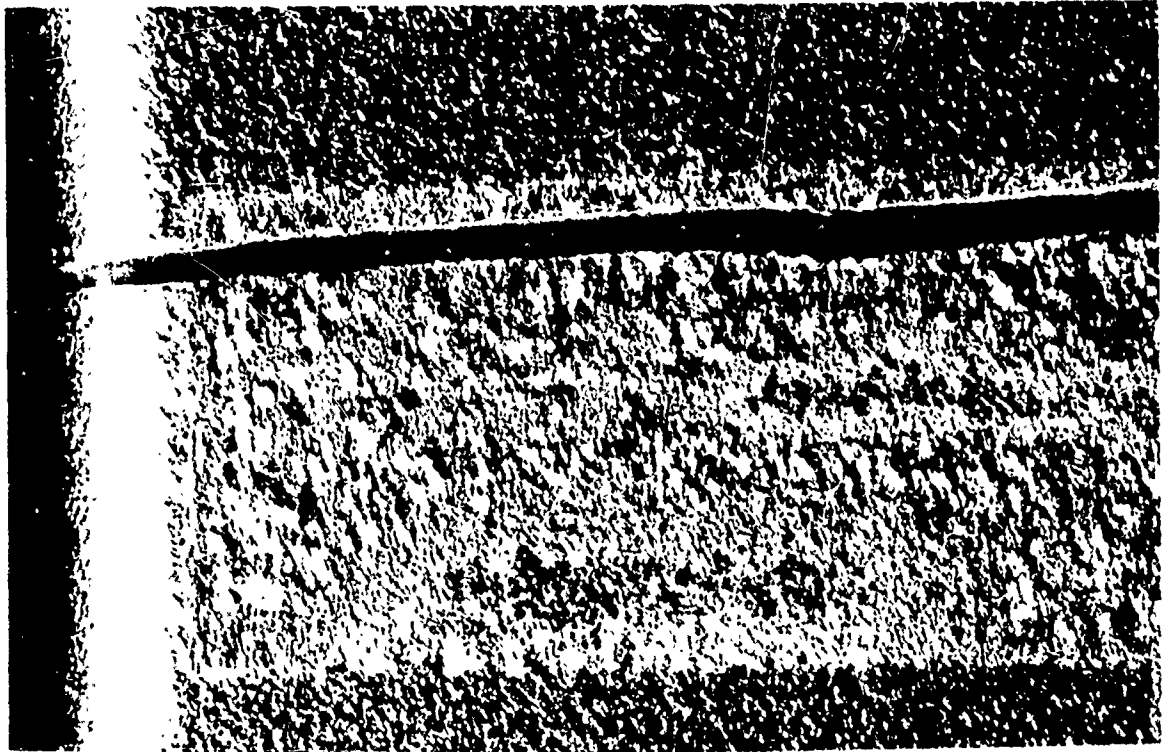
Specimen 39 Showing Detail of Galled Surface After Wear Under 10,000 PSI Contact Pressure and 5-Mil Stroke.
